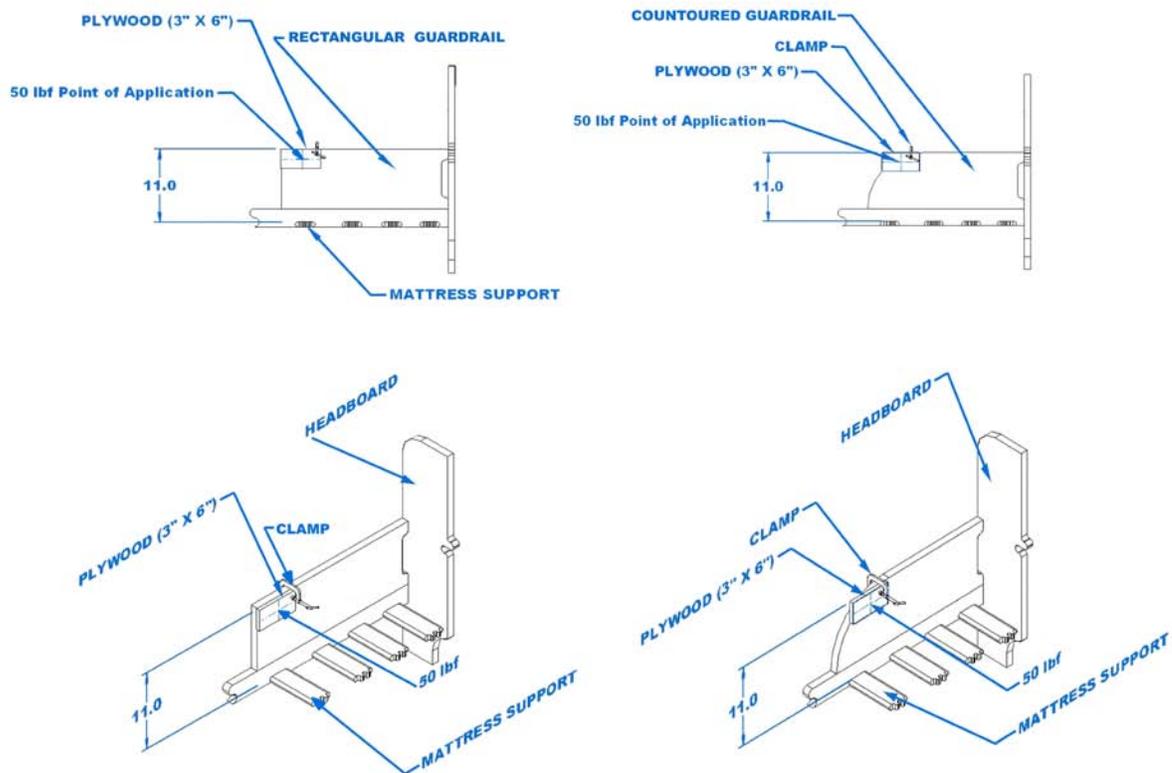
“FIG. 11 Guardrail Structural Integrity Test”
